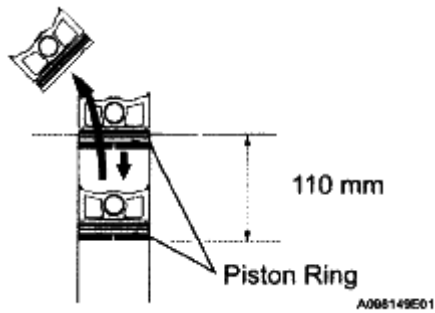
Pushing Piston Ring Little Beyond Bottom Of Ring Travel, 110 mm (4.33 in.) From Top Of Cylinder Block
